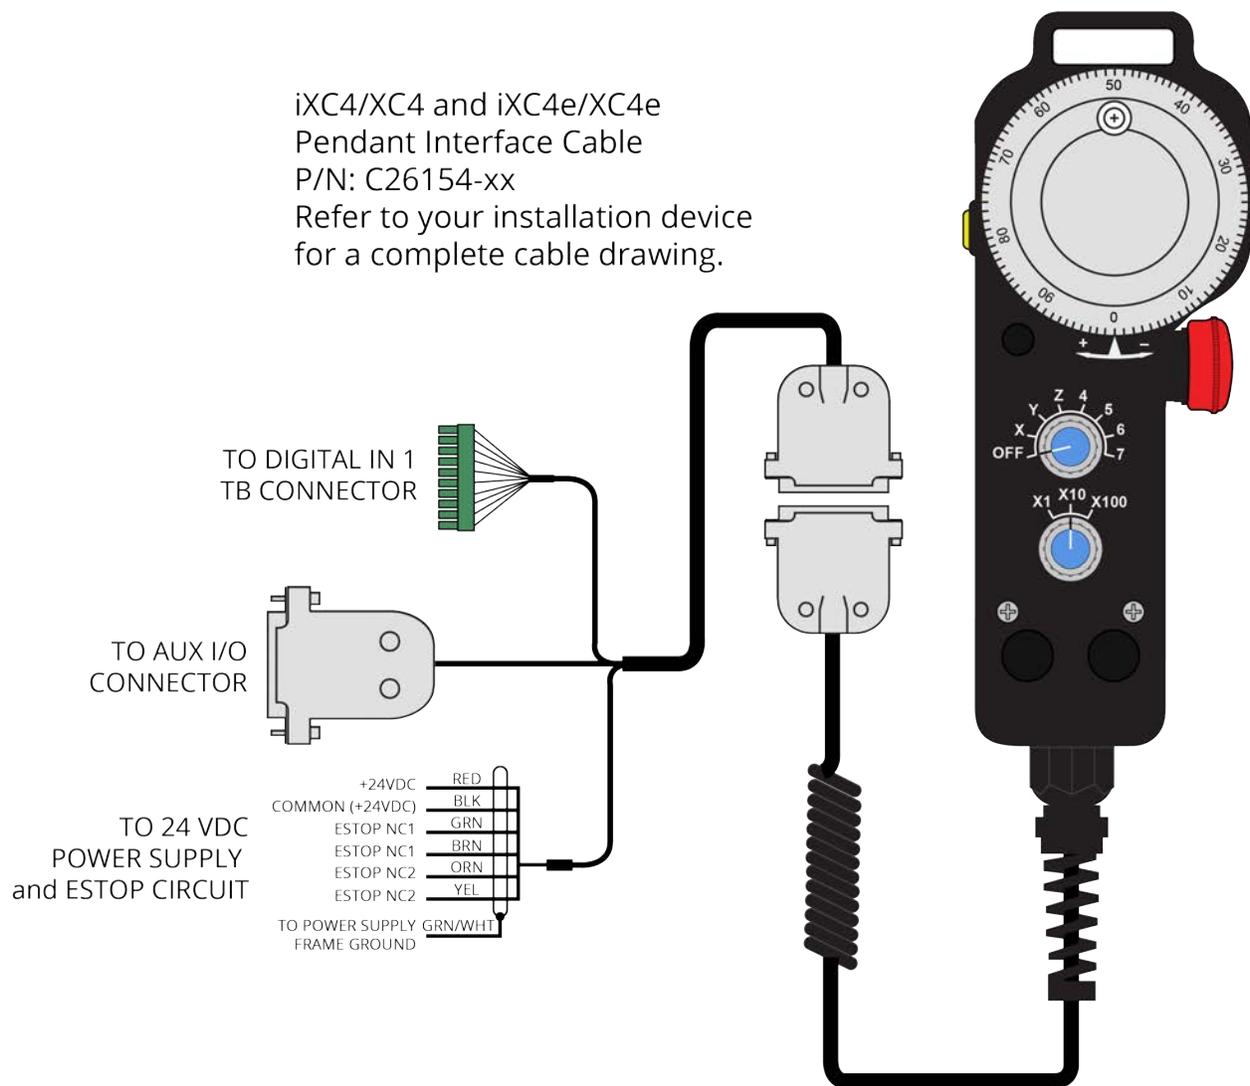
MPG to XC4/XC4e Cable Drawing
